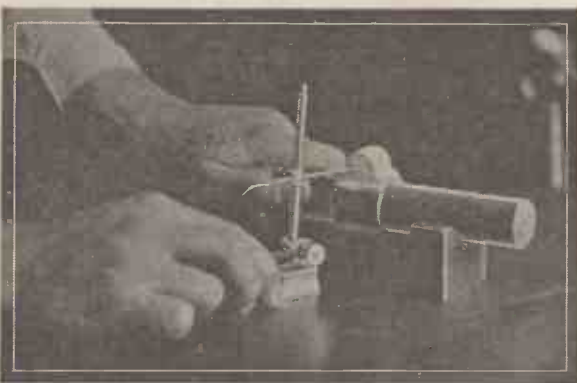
The casting being marked out above is to be drilled through the boss at a definite distance up from the centre hole.
